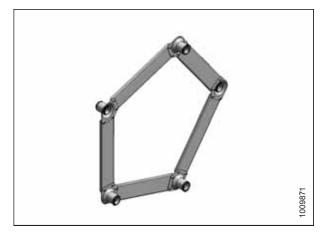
Five-Bat Reinforcing Kit Shown – Six-Bat Reinforcing Kit Similar
